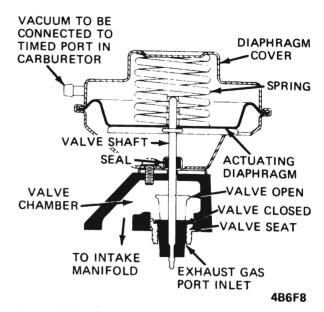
F-8 E.G.R. Valve Cross-Section View (Single Diaphragm Type)
